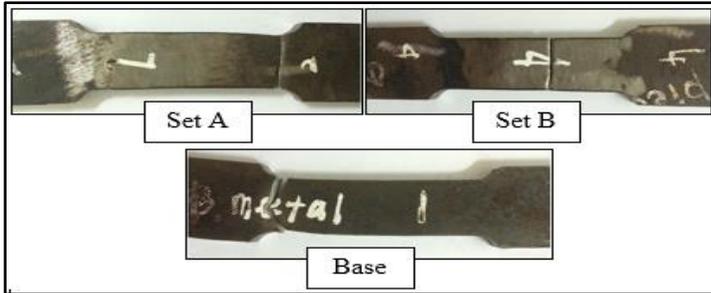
Fatigue Life Fracture on Set A, B and Base specimen.
